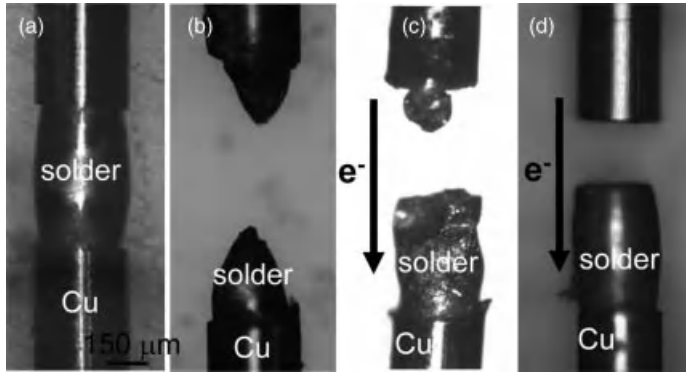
Fracture images of tensile test after EM: (a) optical picture of original sample, (b) fracture image without EM, (c) fracture image after EM, $5 \times 10^3 \text{ A/cm}^2$ at 145°C for 96 h, (d) fracture image after EM, $5 \times 10^3 \text{ A/cm}^2$ at 145°C for 144 h.
